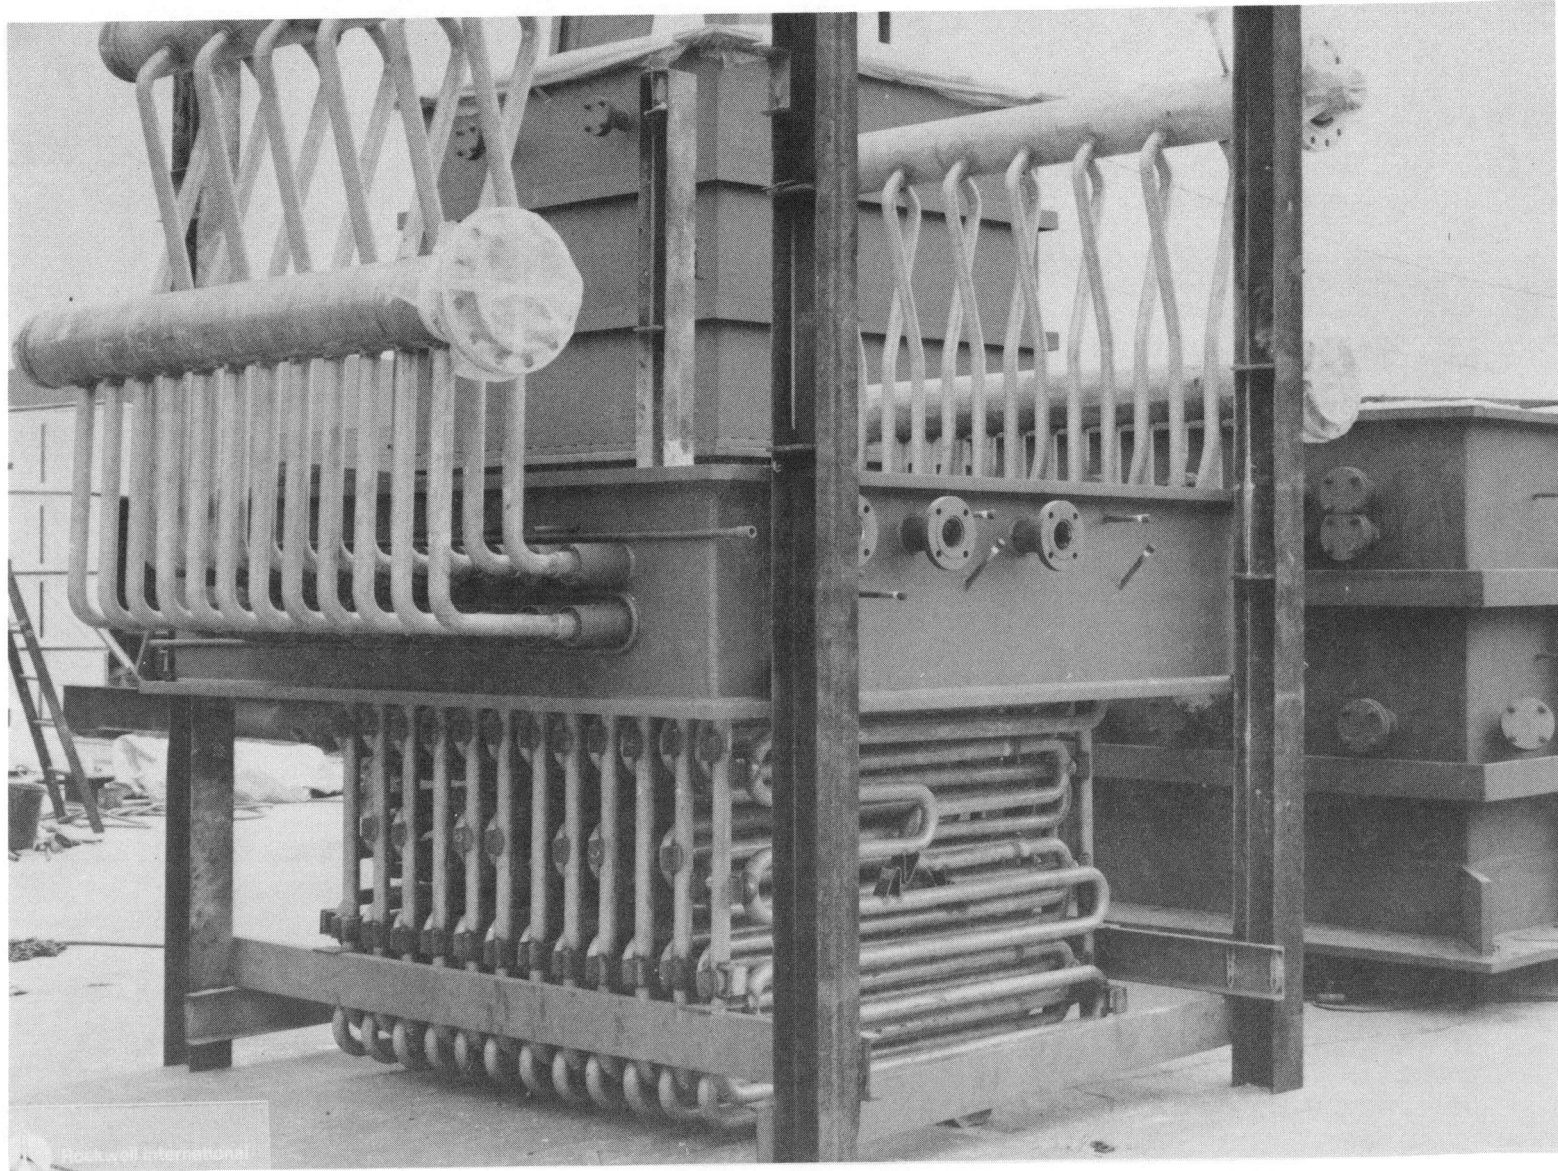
Bed Heat Exchanger (the upper manifolds are the outlets and the lower manifolds are the inlets)
